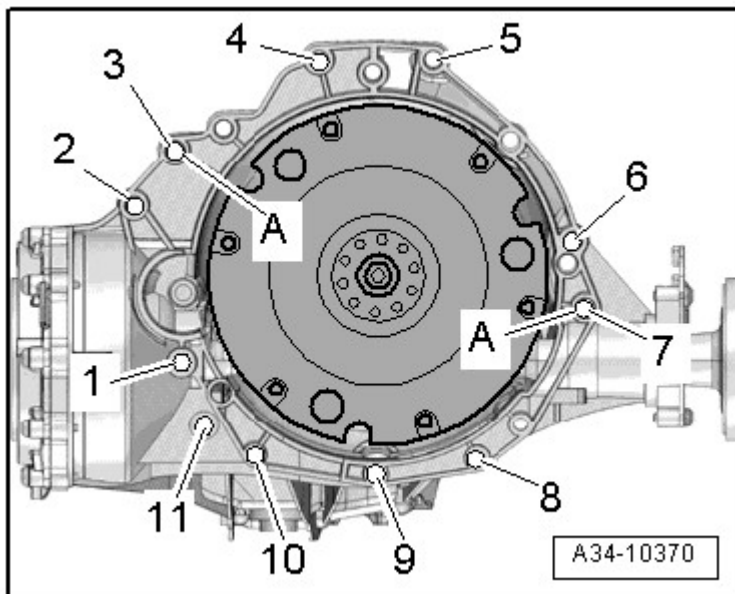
Checking If Alignment Sleeves -A- For Centering Engine/Transmission Are In Cylinder Block
